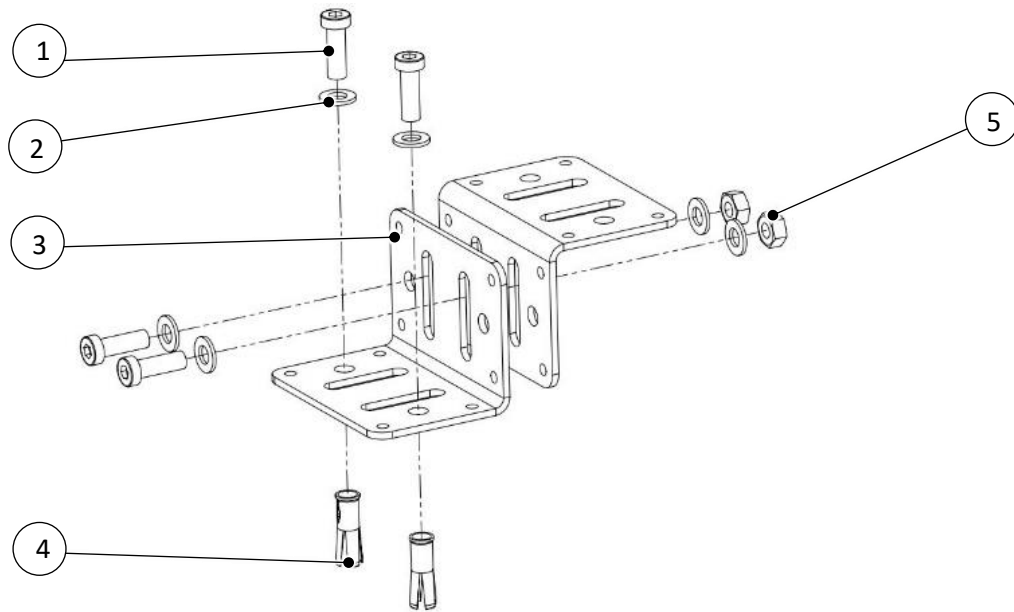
Mounting set for anchoring the MRB to the floor:
